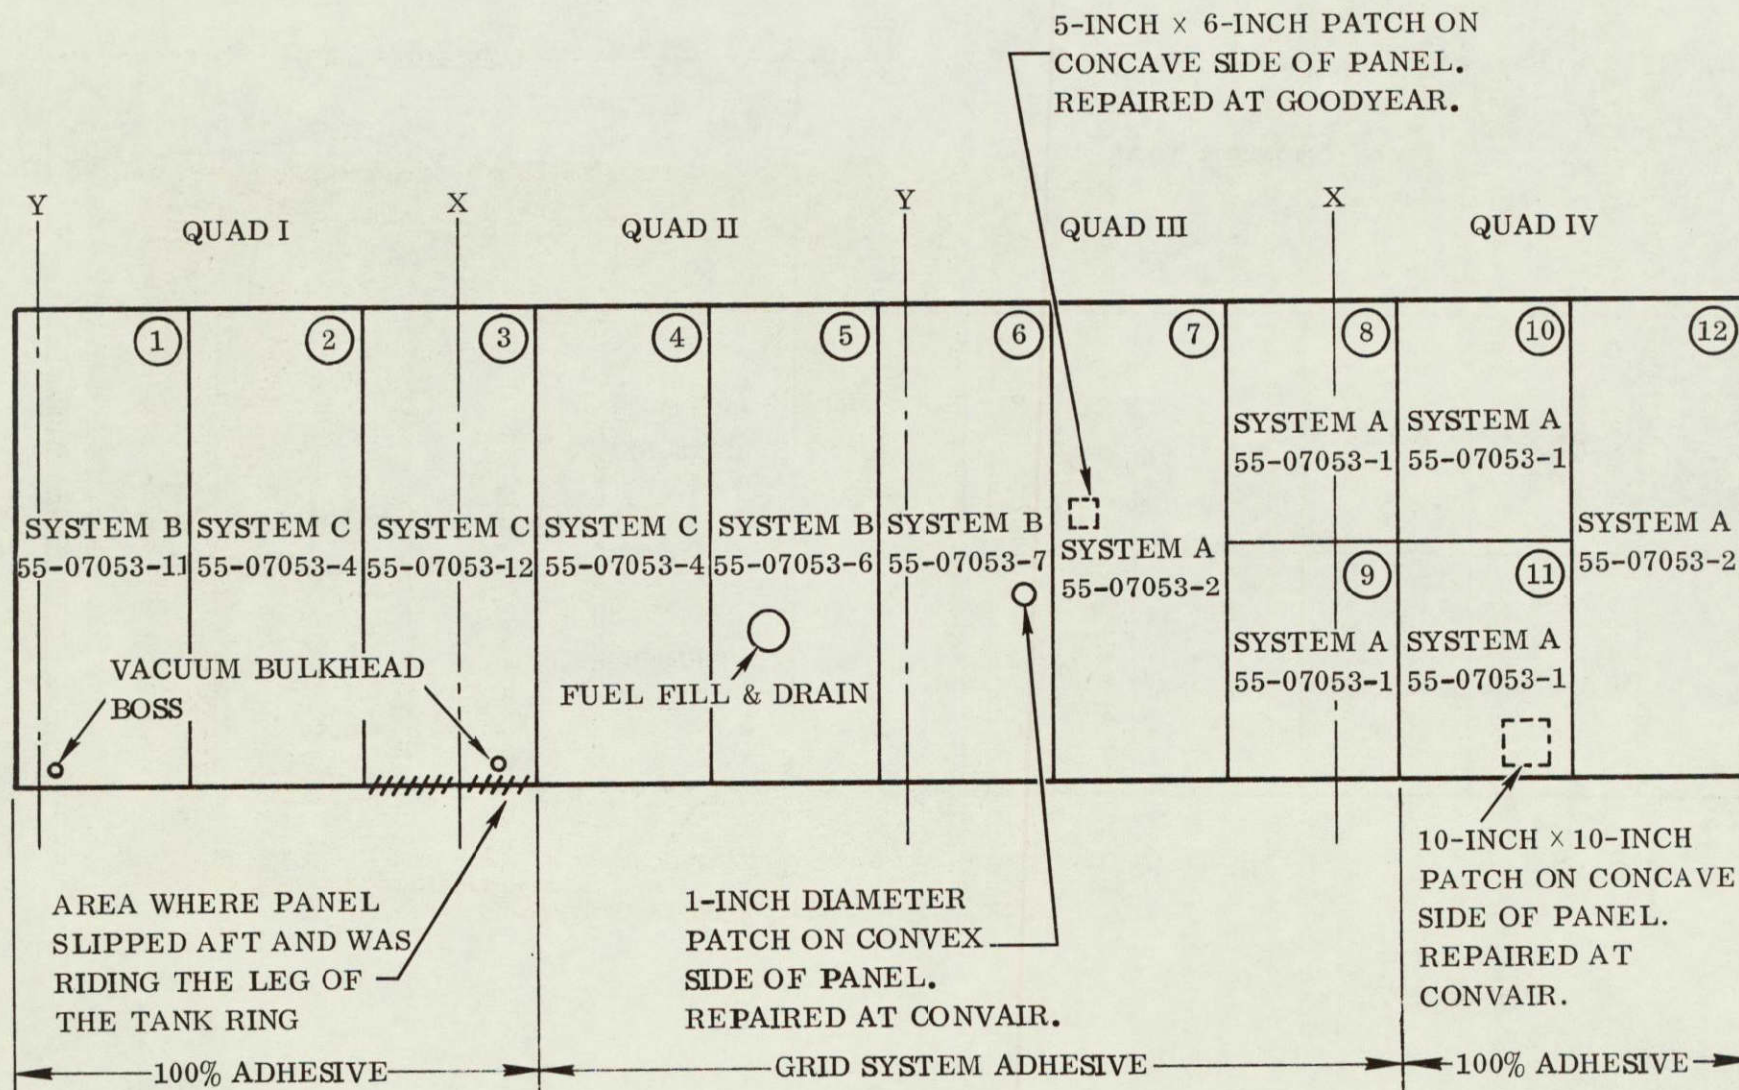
Arrangement Of Insulation Panels On The T-9 Tank Material Evaluation Tests
